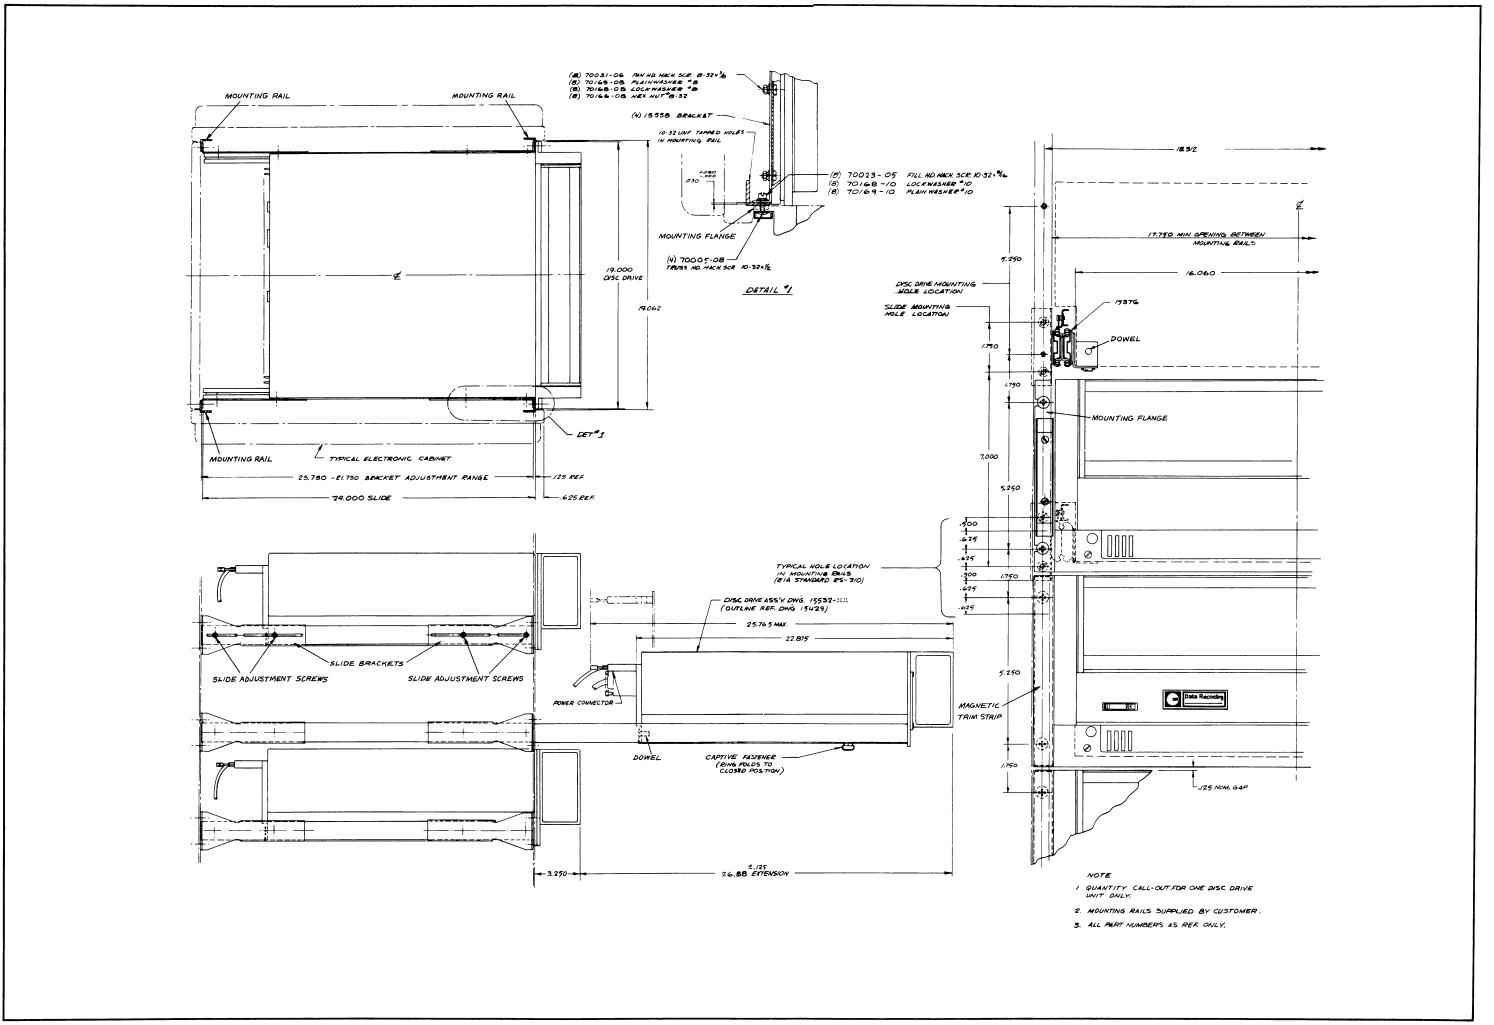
EXTENDED-FRONT RACK MOUNTING
